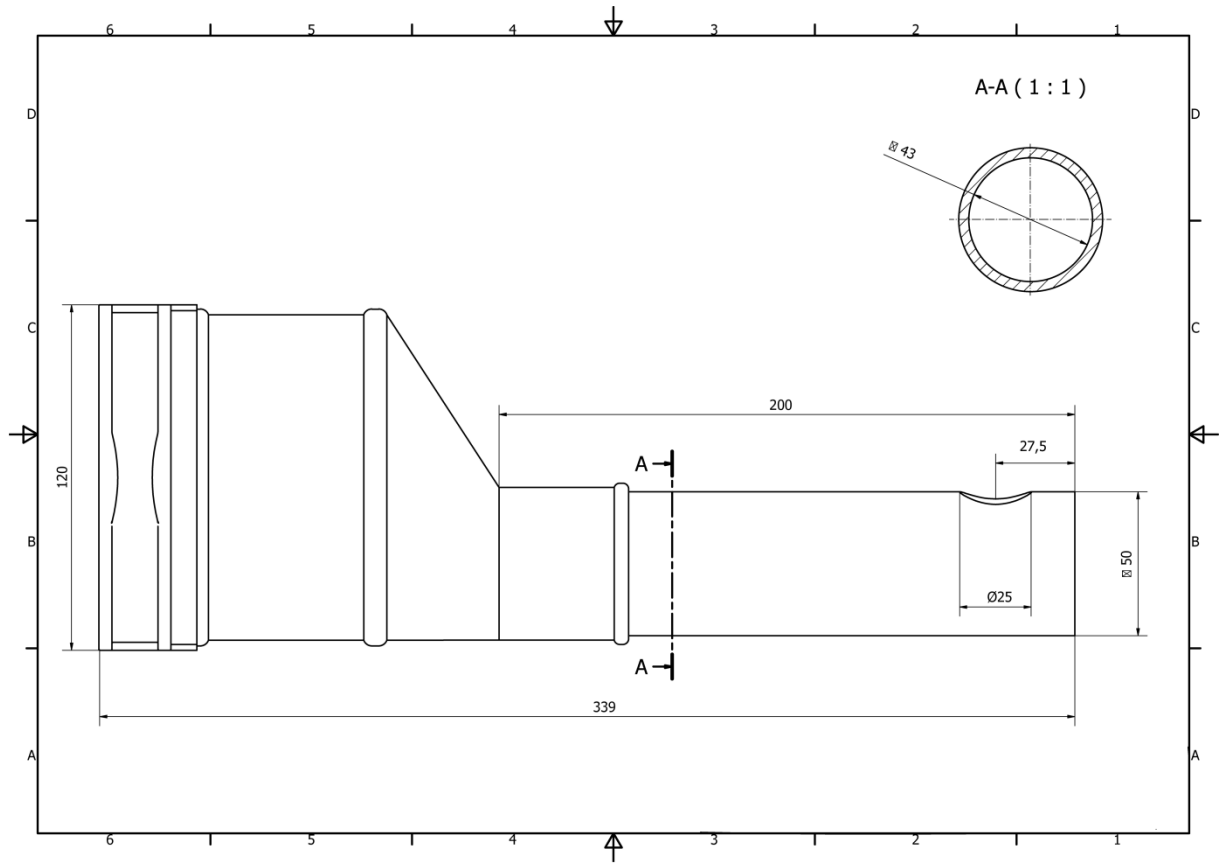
Technical drawing of the 'departure' tunnel. All measurements are given in millimeters.
